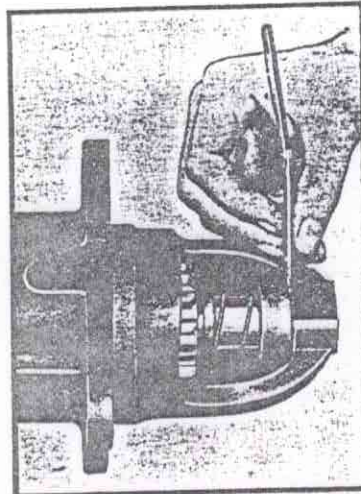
Measuring Bendix drive stop clearance which must be 1/16". Do not compress Bendix spring as this will give an incorrect reading
